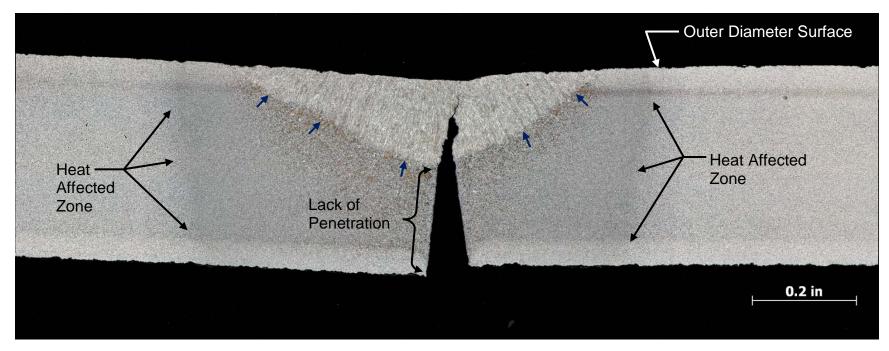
Etched metallographic cross section of the longitudinal seam in pup 3 taken 10 inch north of girth weld C3. The microstructure of the weld was consistent with a fusion welding process along the outer diameter surface of the seam. Blue arrows – weld pool boundary along outer diameter surface seam.
